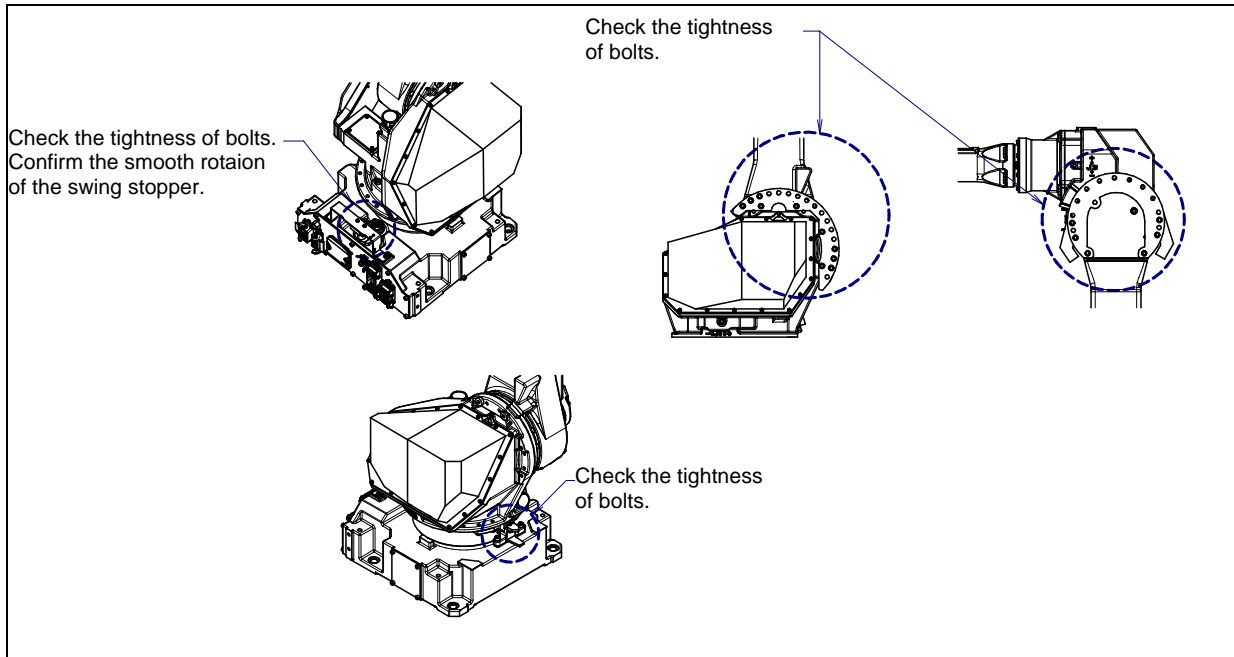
Check of fixed mechanical stopper and adjustable mechanical stopper
